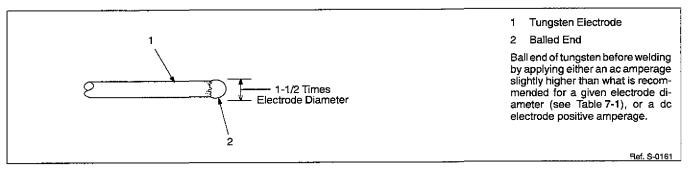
Preparing Tungsten For AC Or DC Electrode Positive (DCEP) Welding
